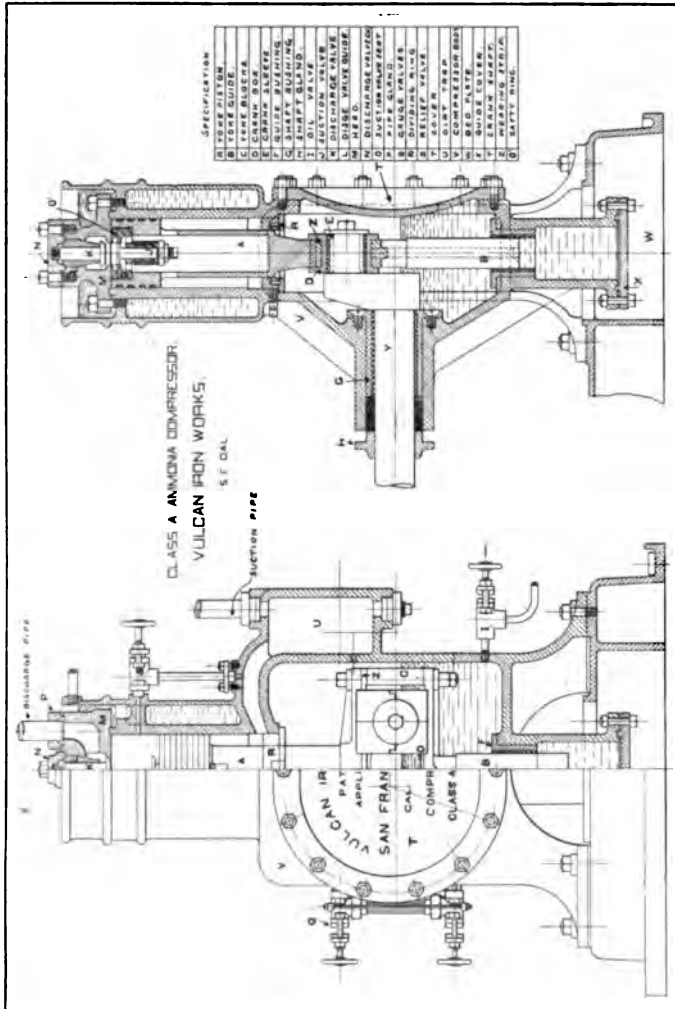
SECTIONAL VIEW "VULCAN" COMPRESSOR, CLASS "A."
